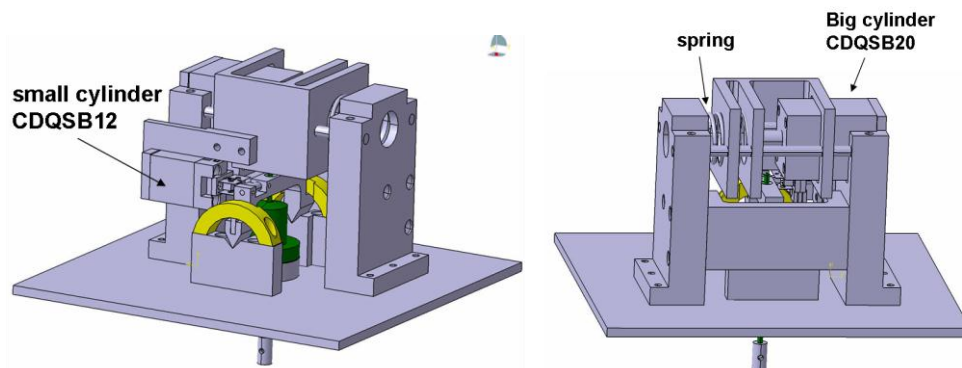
Details of the mechanism of changing filter with the use of wobble stick (vacuum manipulator)
